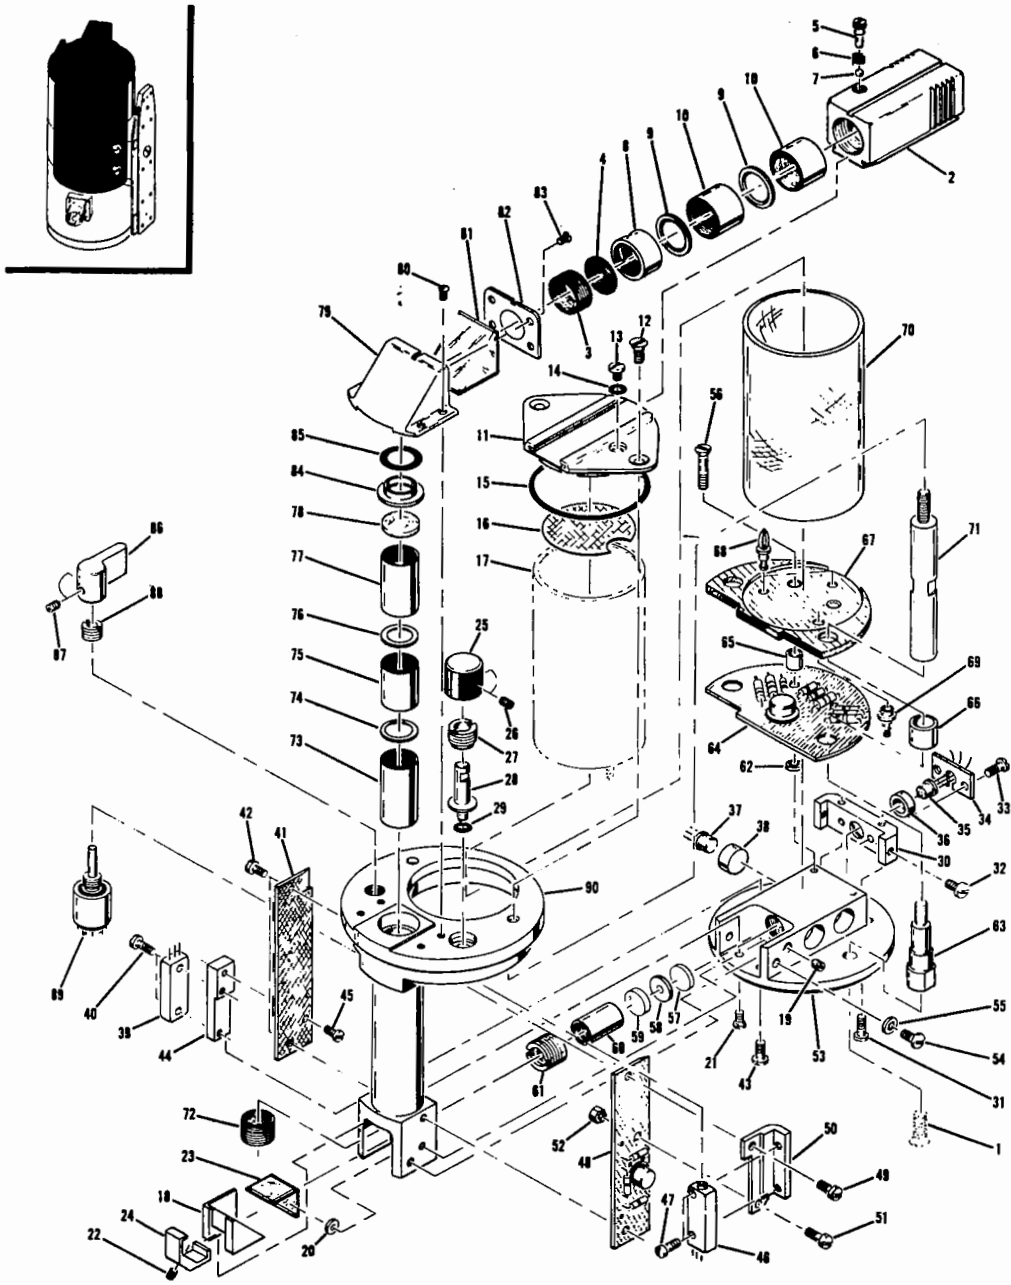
Inflight Photometer Optical-Electrical Assembly
